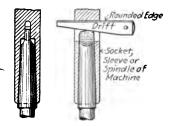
Illustrates how the taper shank with tang is held in taper hole, and also the use of the drift to remove the taper shank from the taper hole of the socket, sleeve, or spindle as the case may be.
